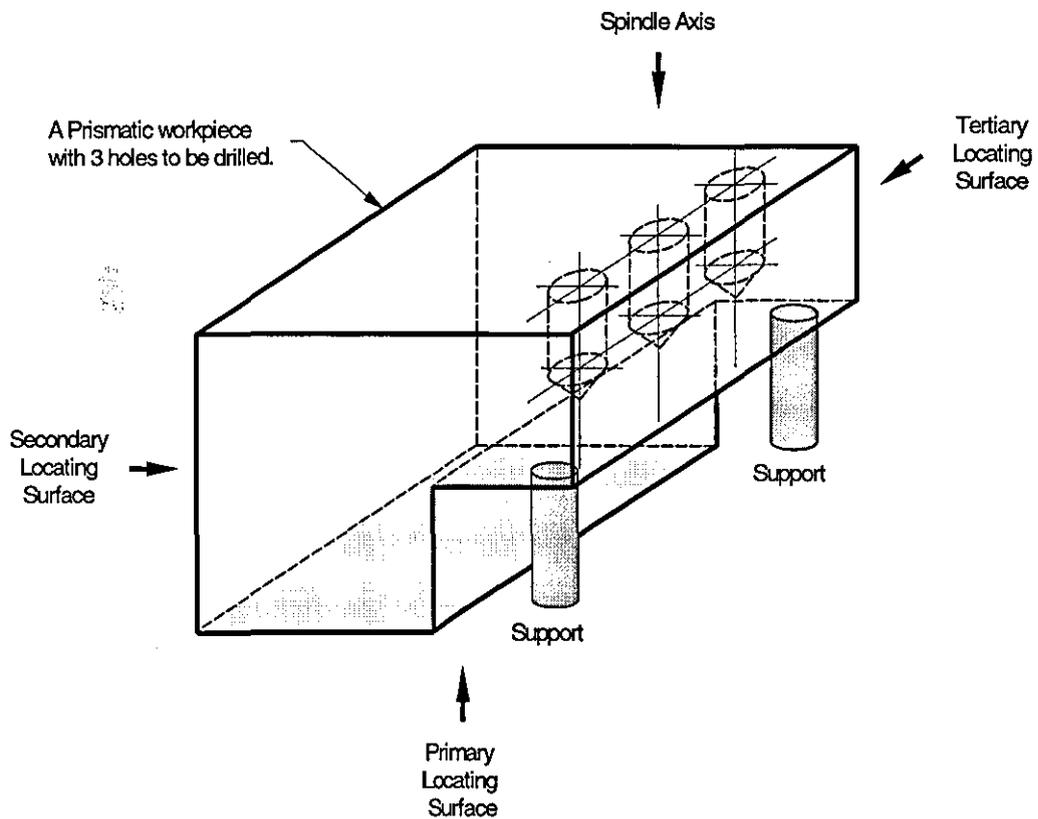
A Prismatic Workpiece with Three Blind Holes Using 3-2-1 Locating Method
